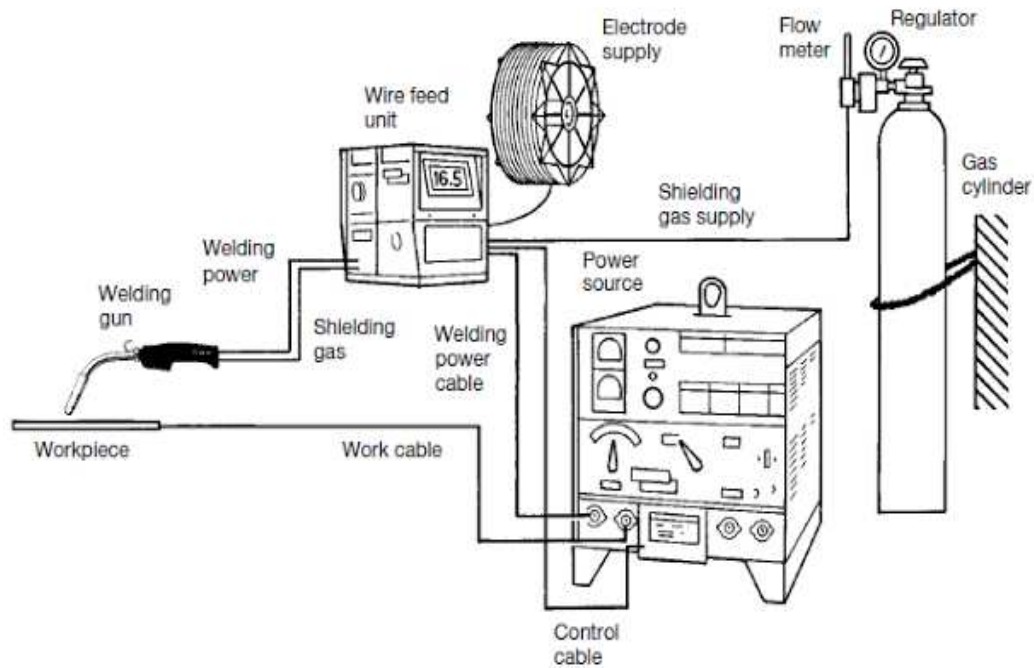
Gas metal arc welding equipment[26]
